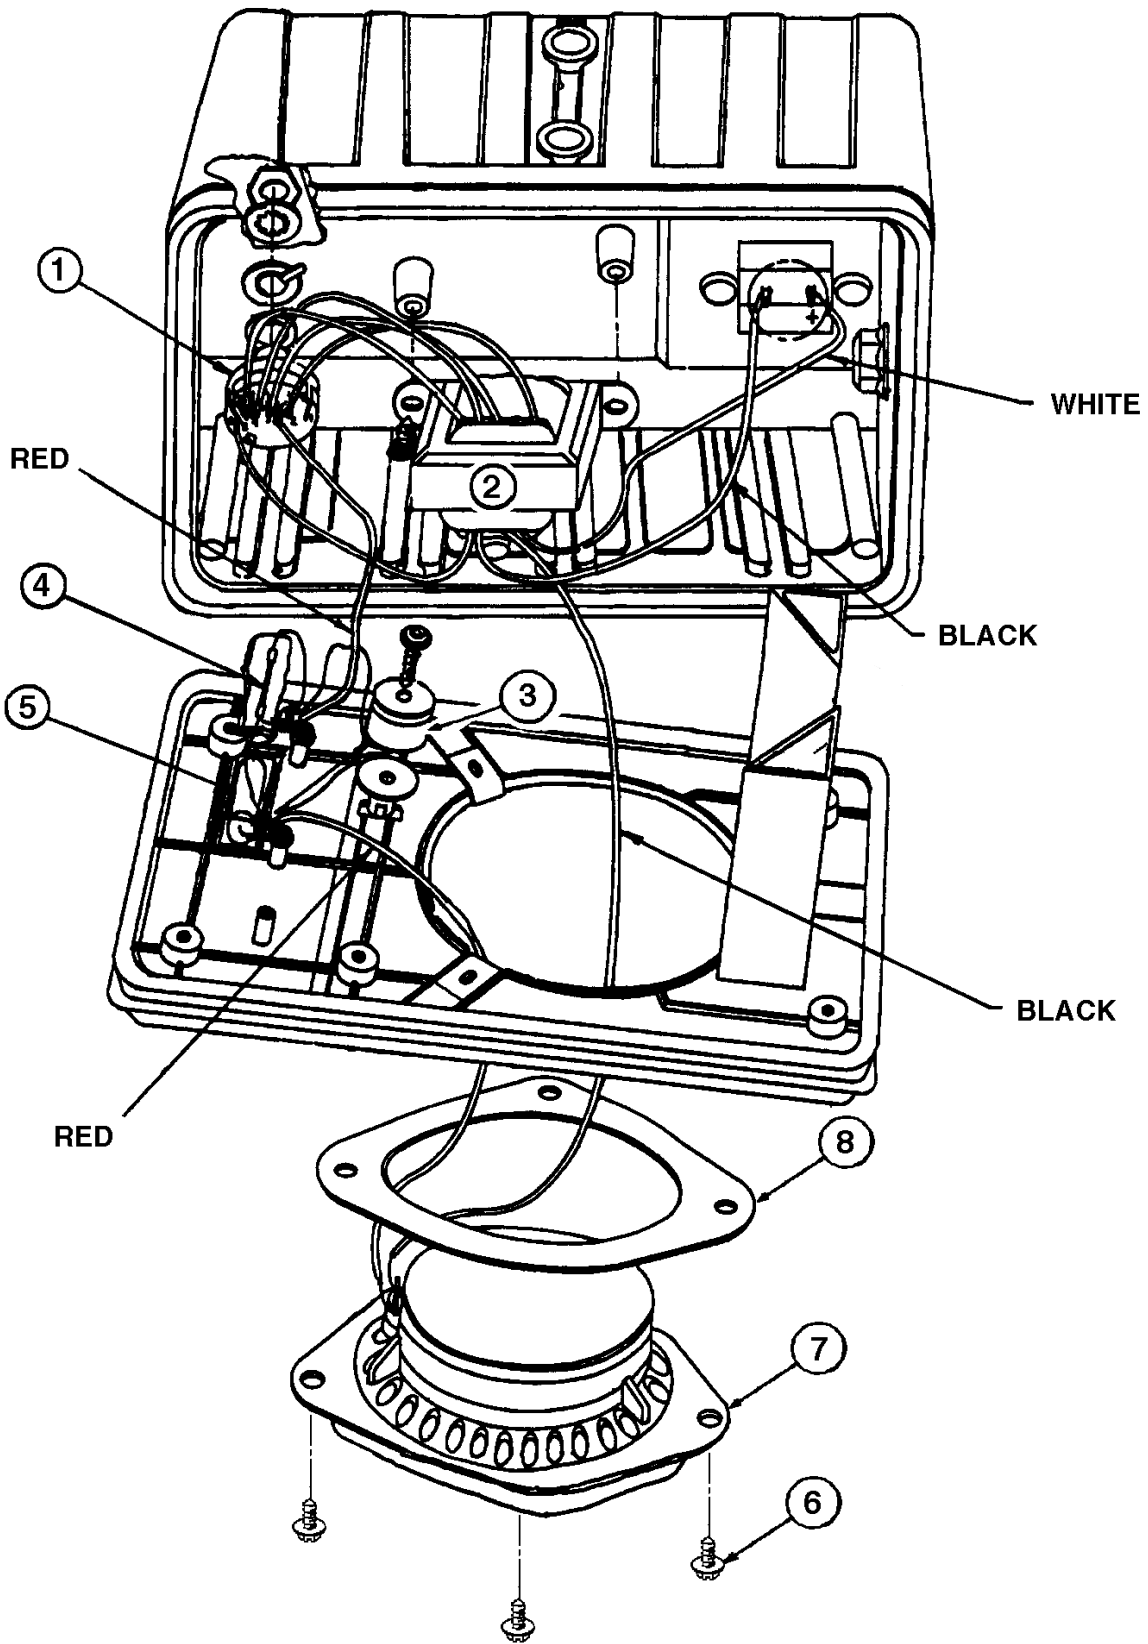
102® Surface-Mount Loudspeaker Exploded View
